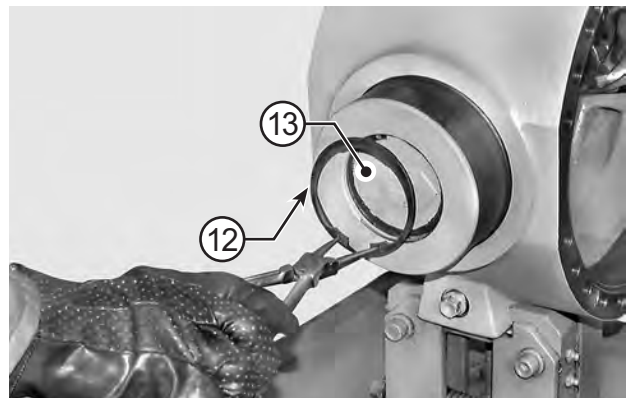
Remove the snap ring (12) and locking cap (13).
